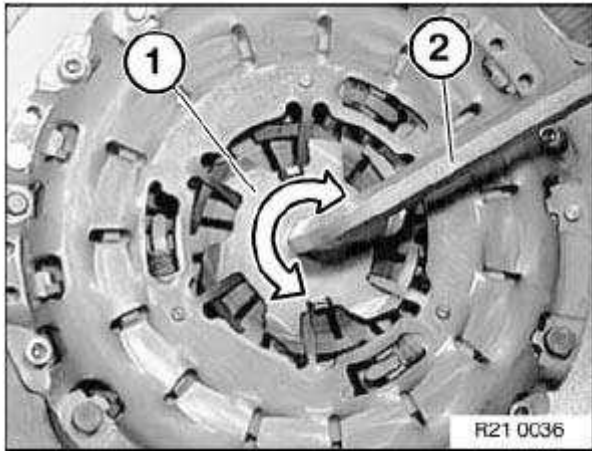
Unscrewing Locking Piece Clockwise Or Counterclockwise
